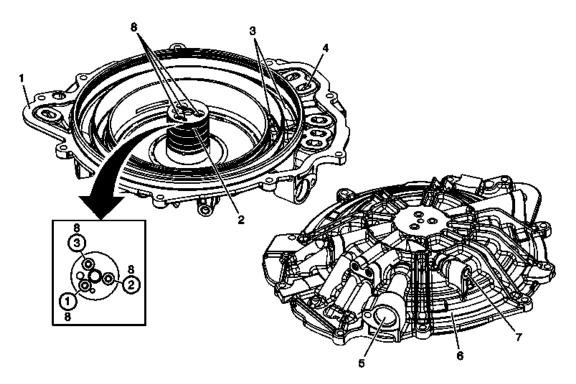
View Of 2-6 Clutch Piston Courtesy of GENERAL MOTORS COMPANY
